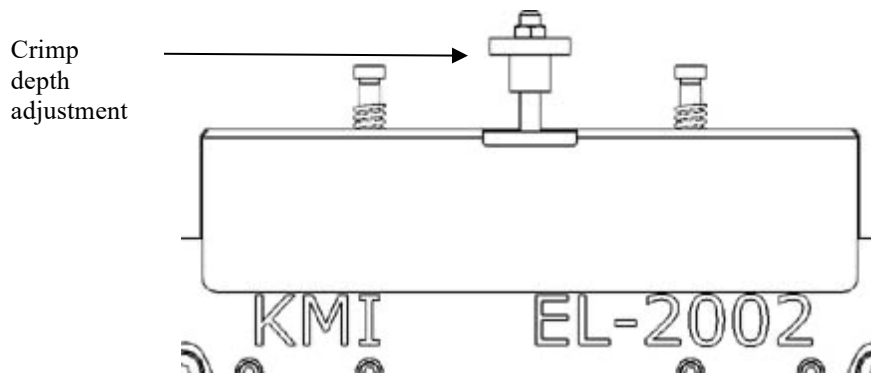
This figure shows the location of the crimp depth adjustment knob.
